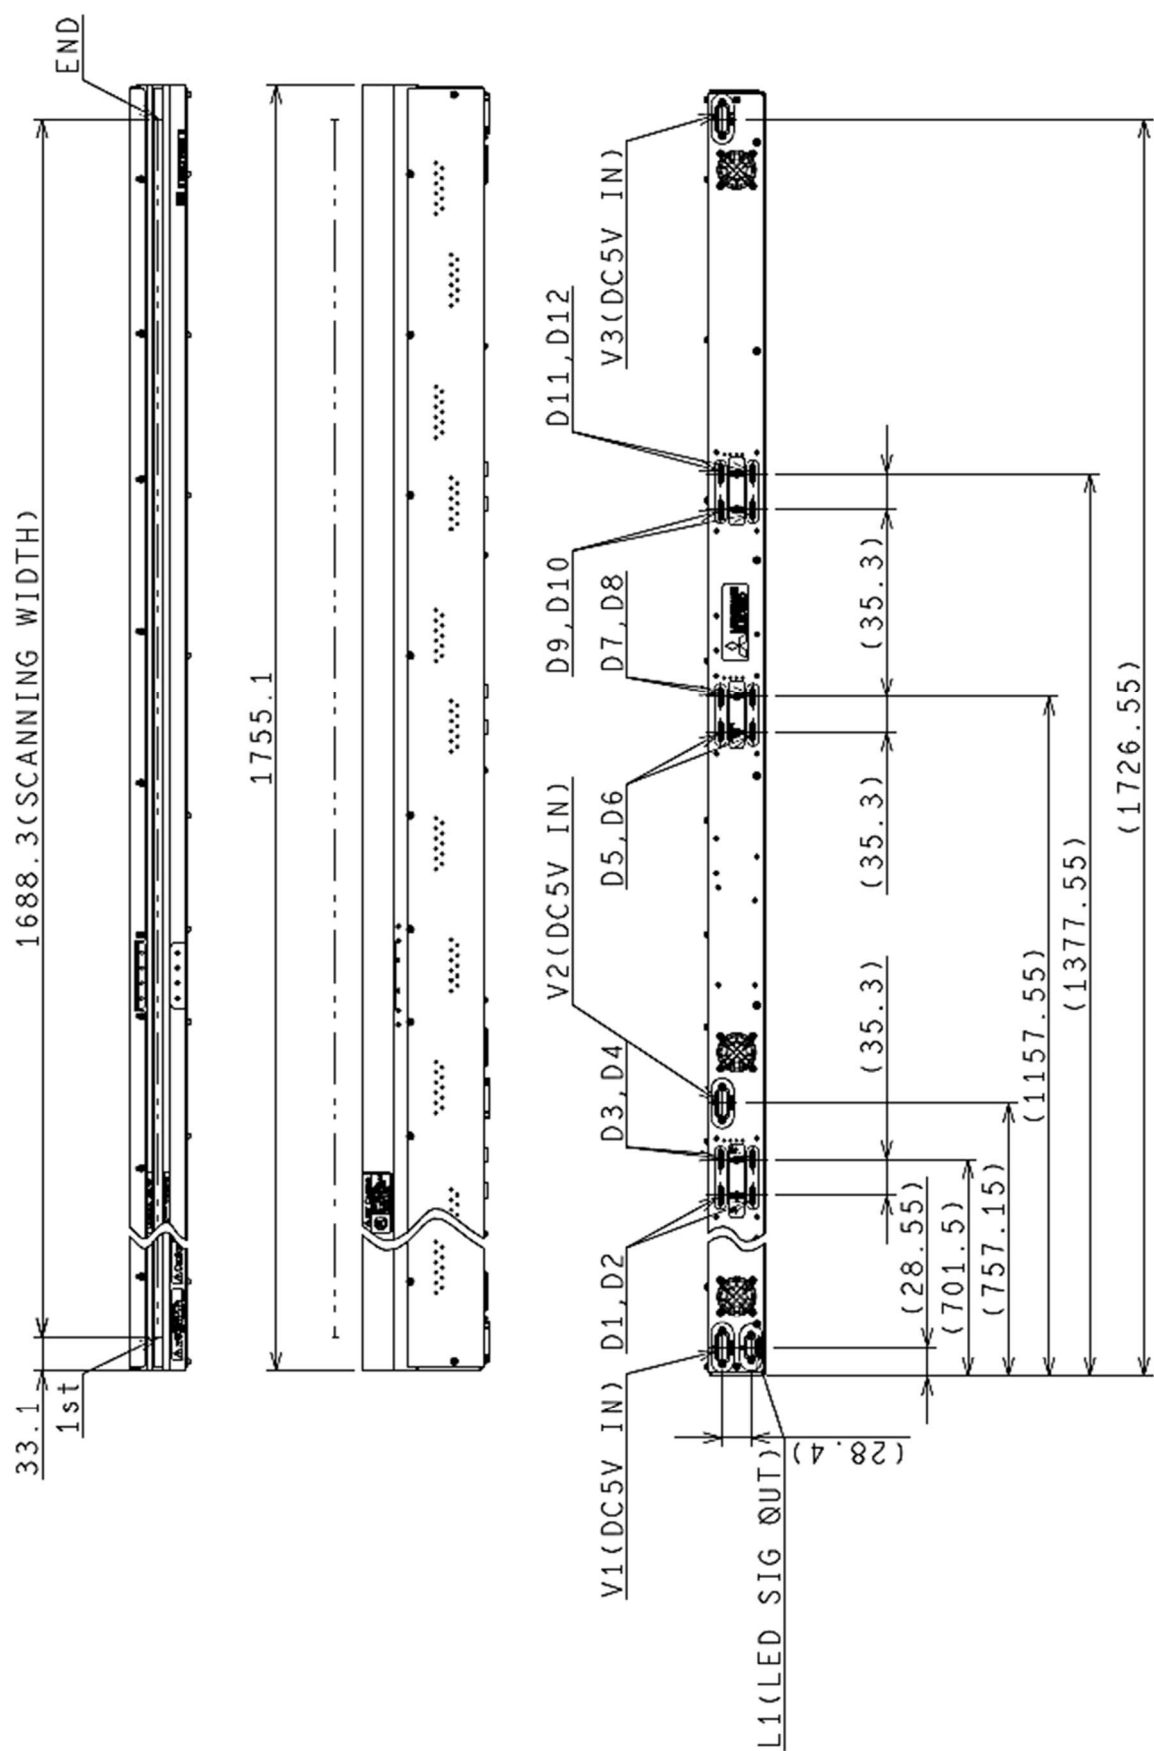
KD6R1688DXL-NL Outline drawing (at 24°C)
